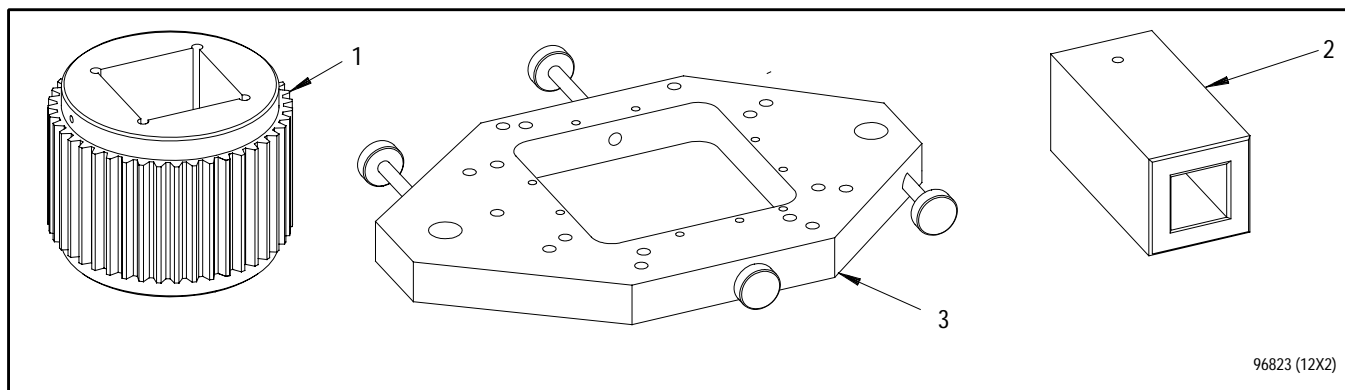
B. PWA 57806 or PWA 57649 Adapter Set
